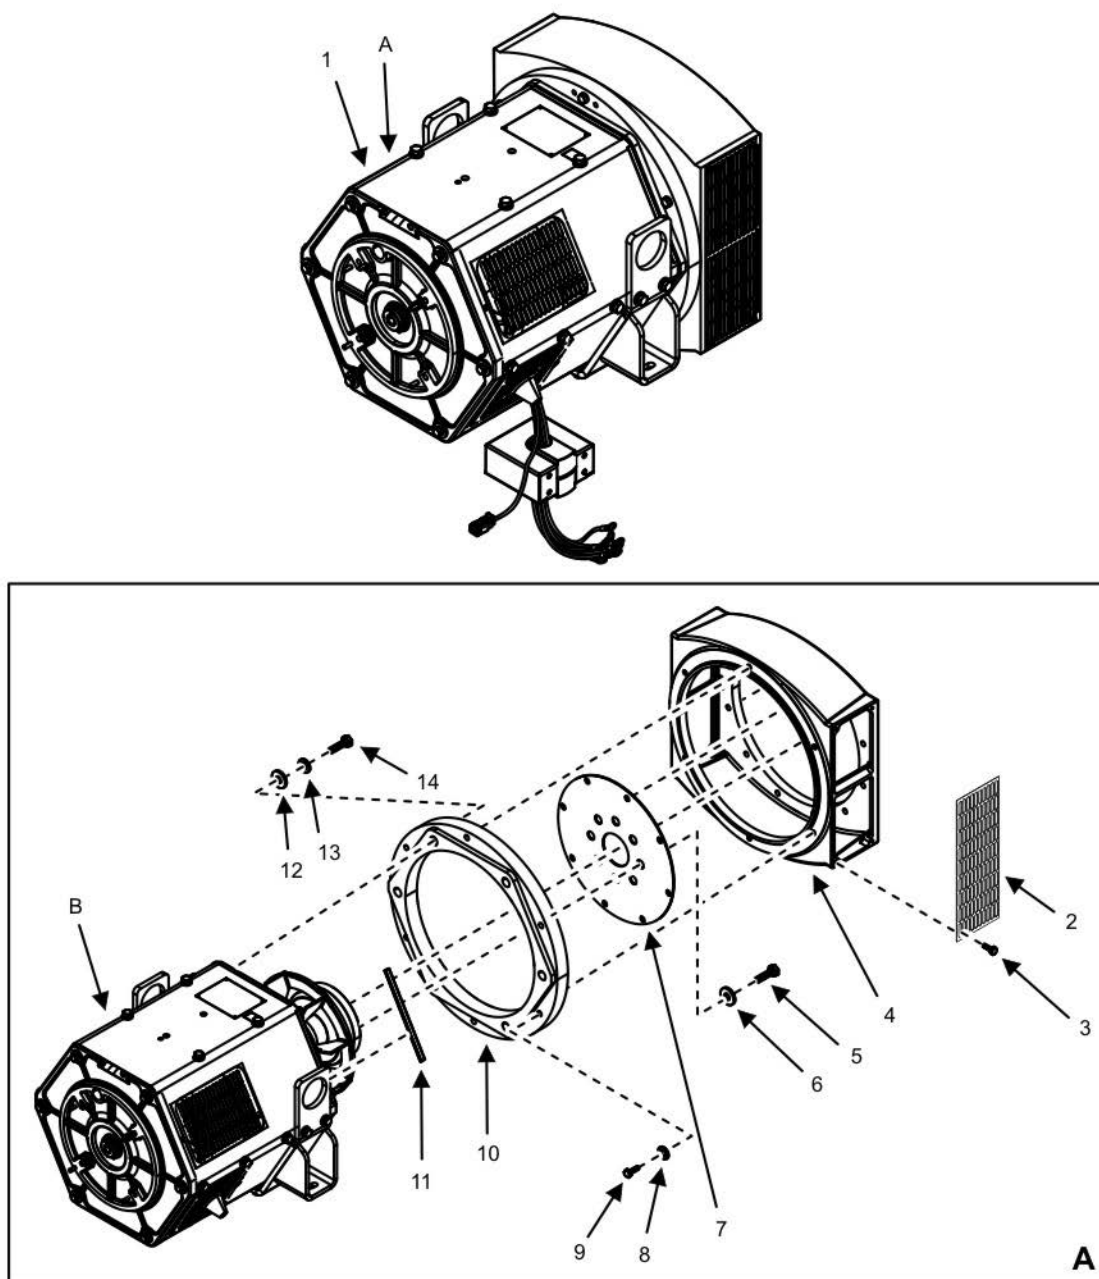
AC Generator Assembly, 50/60 Hz (Sheet 1 of 5).
